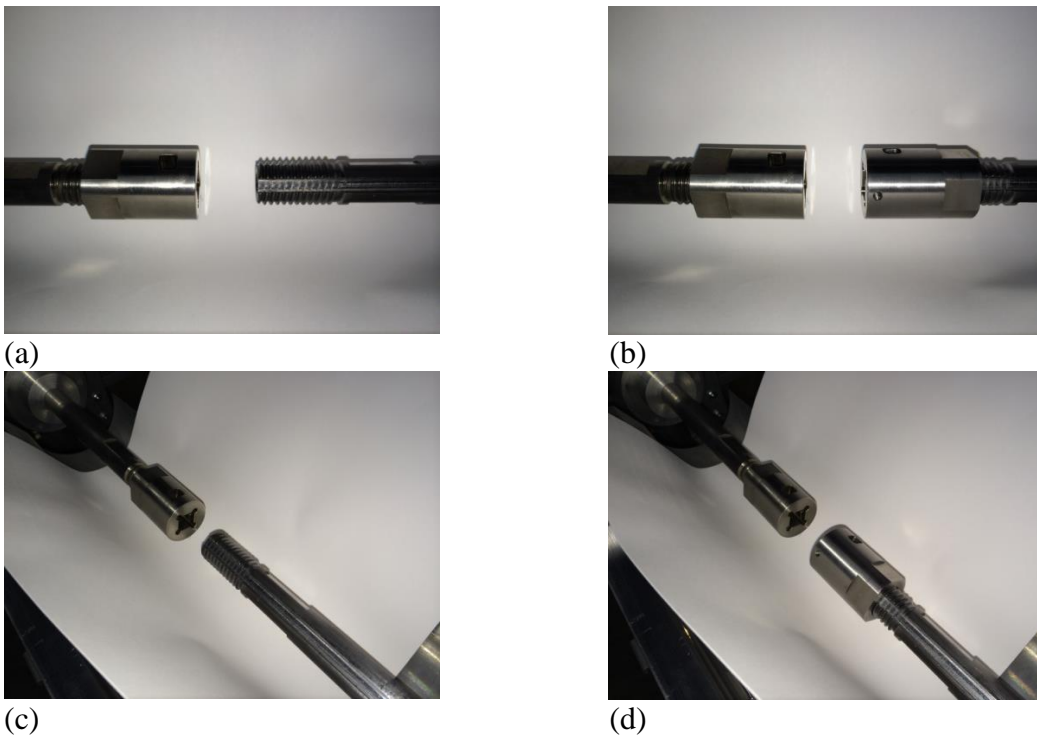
(a) Images show the left grip fixed and the right grip off, (b) both grips fixed, (c) isometric view with the left grip fixed and the right grip off, and (d) isometric view of both grips fixed.
